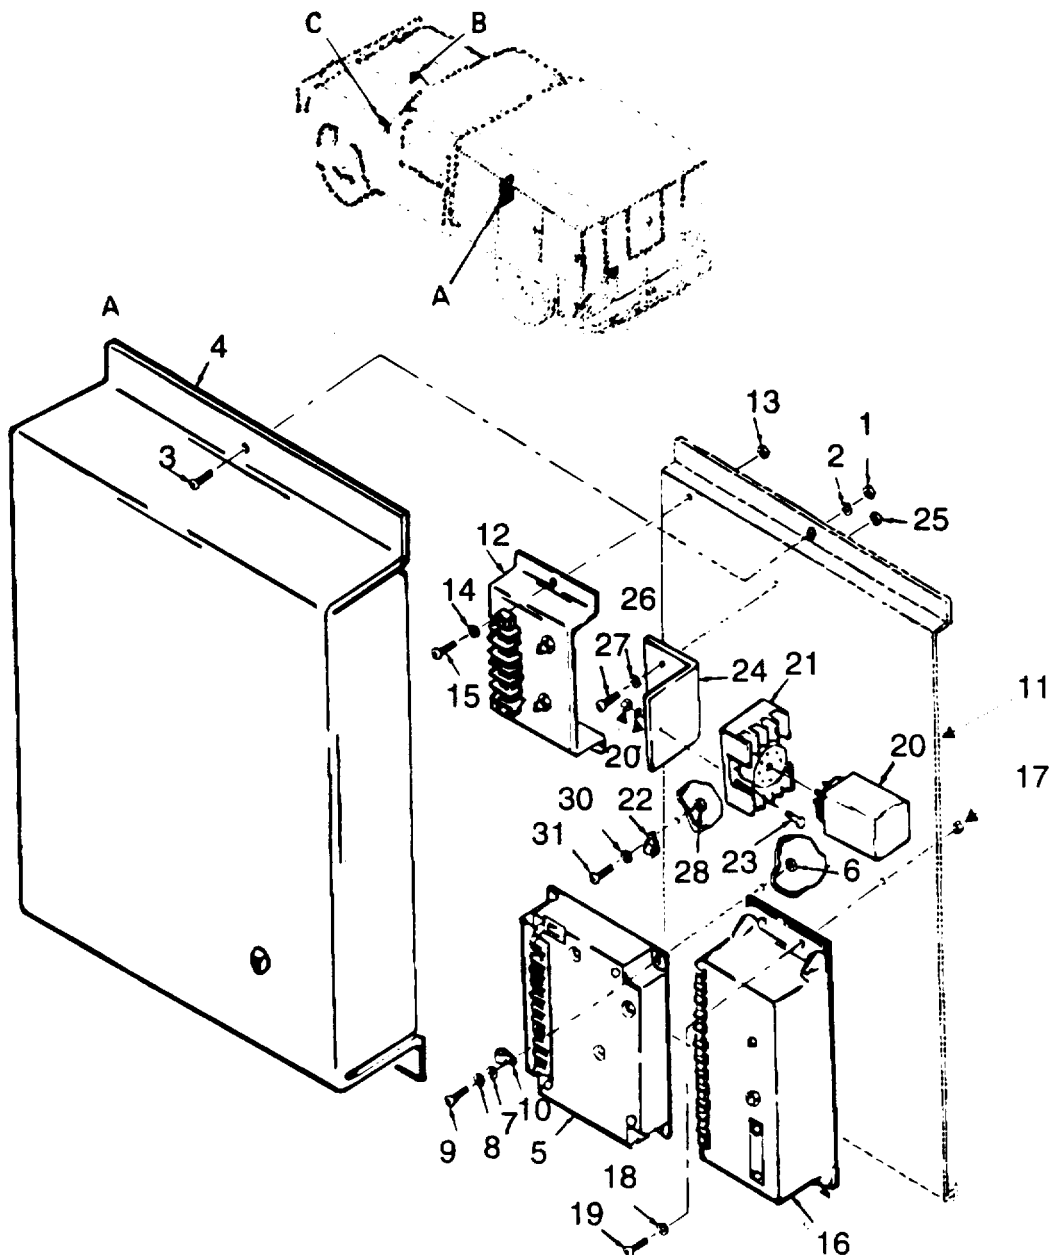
Electronic Governor System, Removal / Installation (Sheet 1 of 2).
